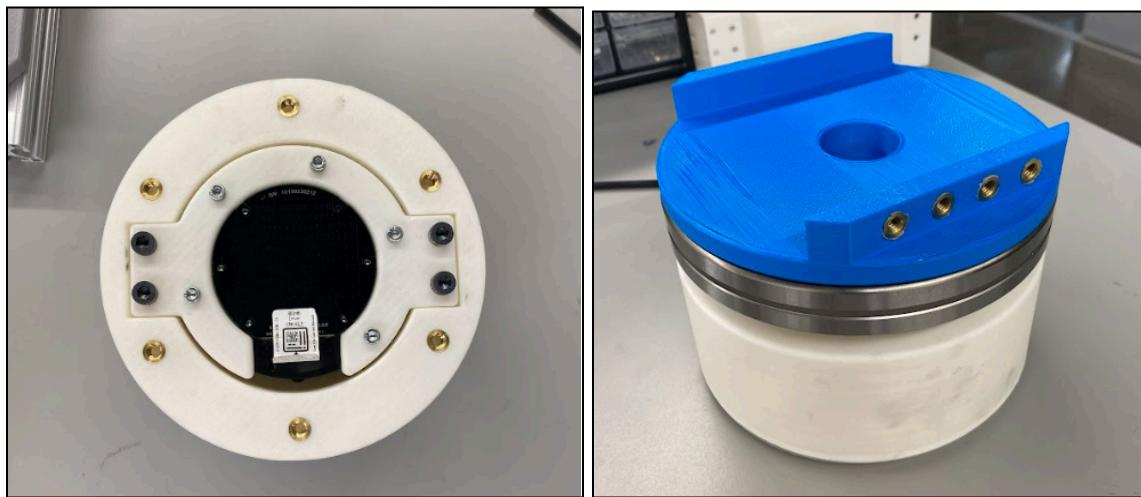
Assembling J1 Motor Holder and the J1 Motor Cover
